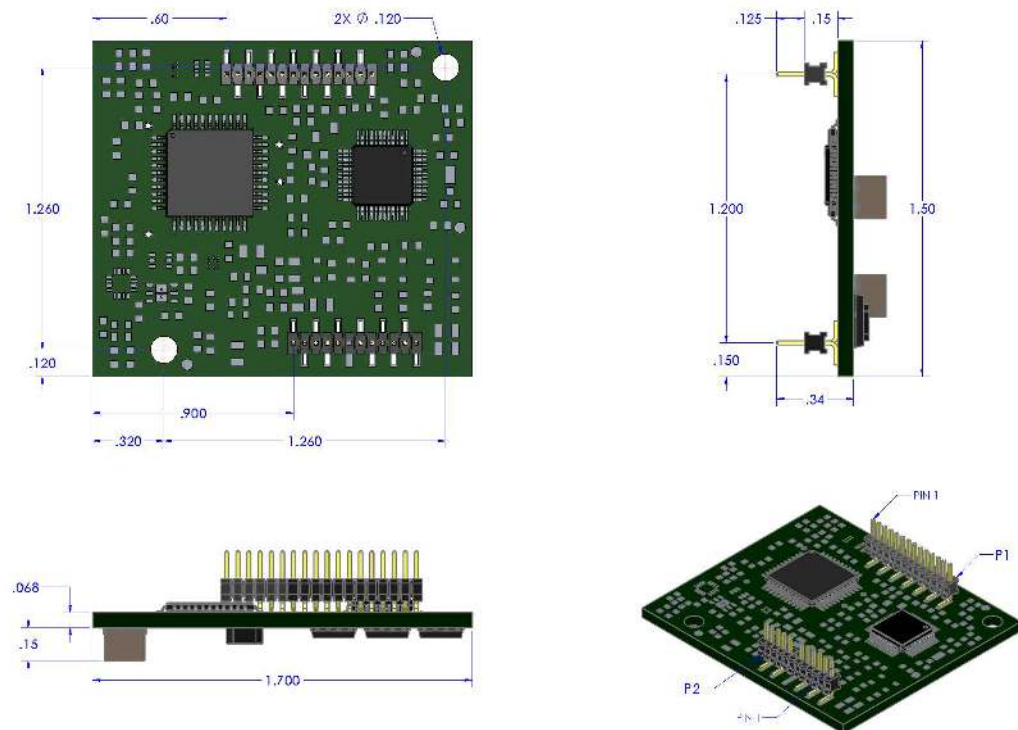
AZ_12A8 / AZ_6A8 Mounting Dimensions (inches and [mm])
